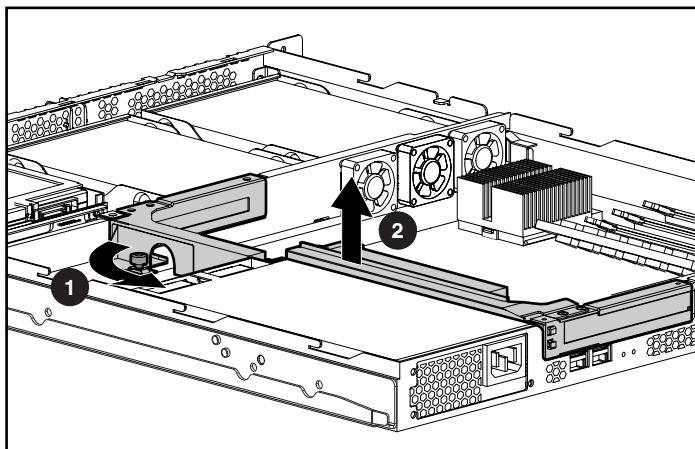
Removing the PCI riser board assembly (module removed for clarity)
